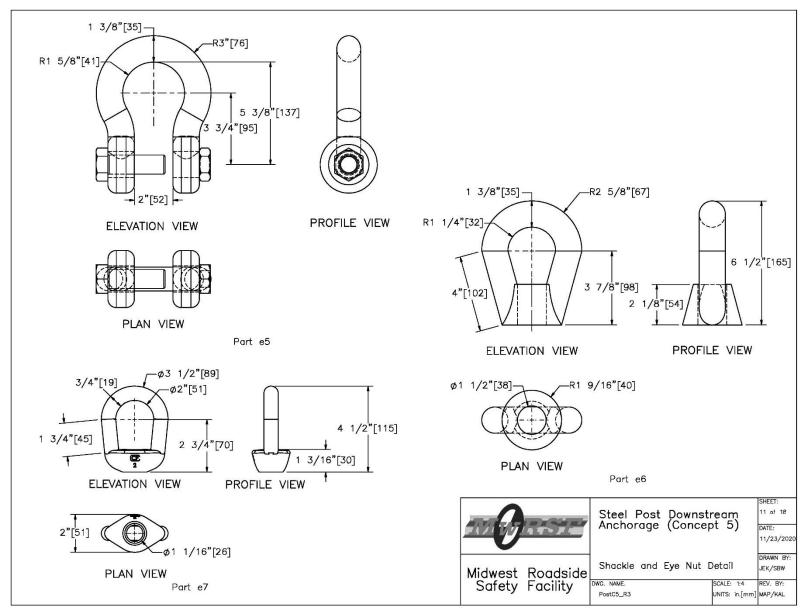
Shackle and Eye Nut Detail, Test No. SPDA-5
